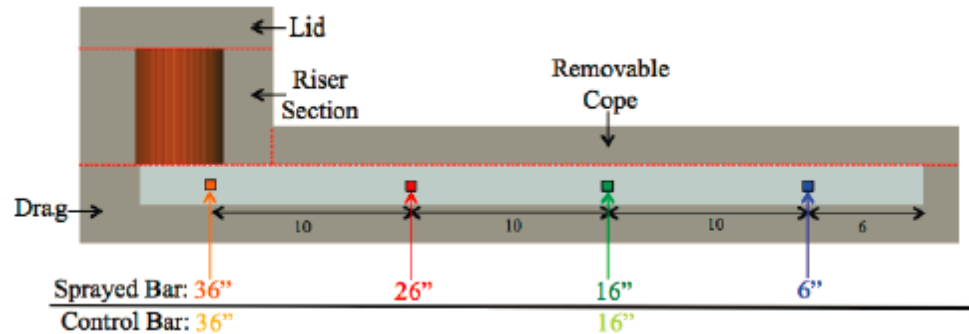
Geometry of the casting and thermocouple locations after Thomas et al. [21]
